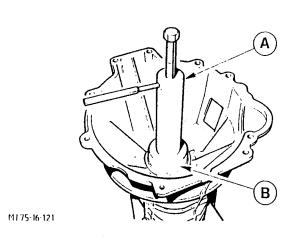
Pull off front transmission housing. A - Special Tool 16-041 B - Special Tool 16-041-01
